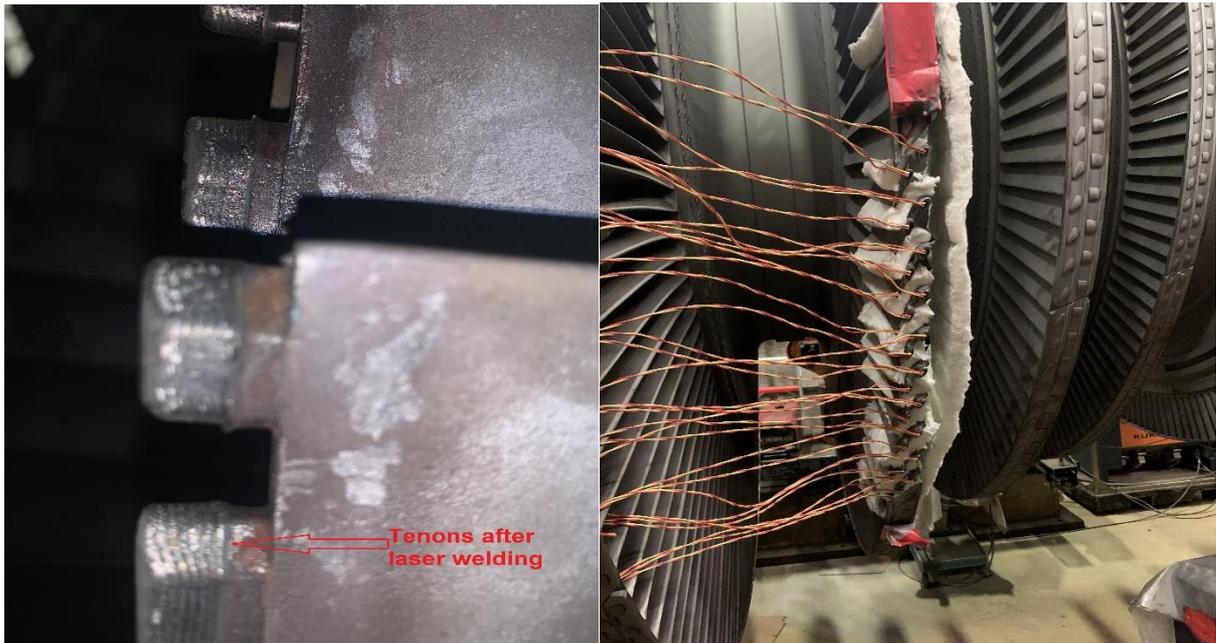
(a). Illustration of Tenons after laser welding, (b). Illustration PWHT set-up
